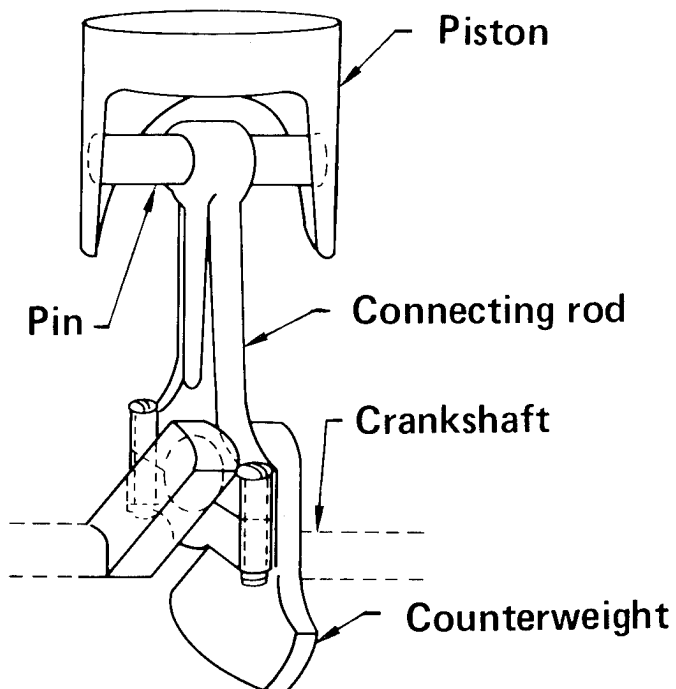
Prototype FP/aluminum composite connecting rods are being fabricated by DuPont to replace steel connecting rods.
